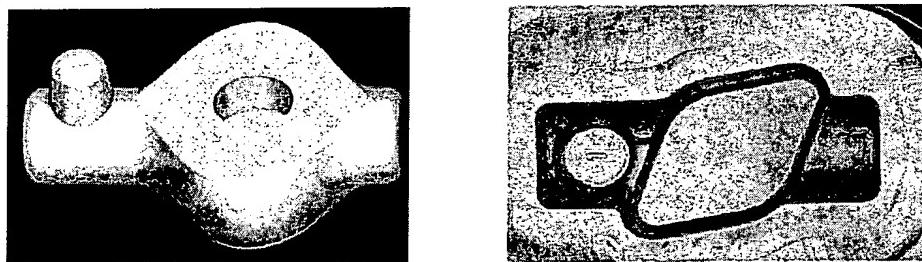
Re-designed SKL-Flange and the existing one produced by drop forging.
